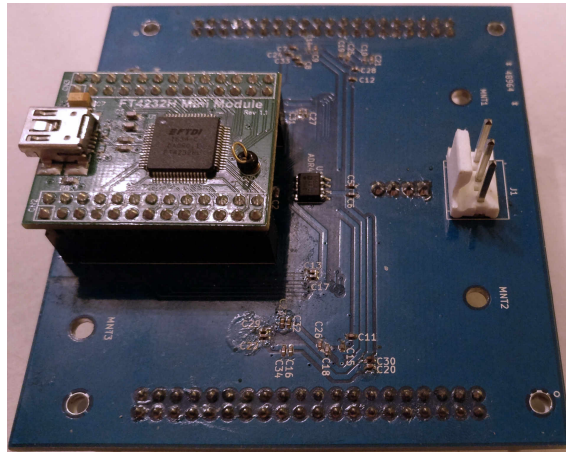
Full DAC PCB and FTDI daughter board, case and IDC cables not shown.
